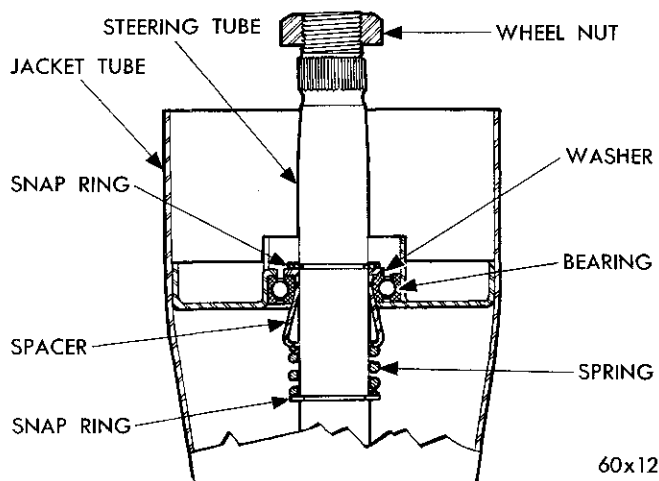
Jacket Tube Installation (PS-1 and PS-3)
